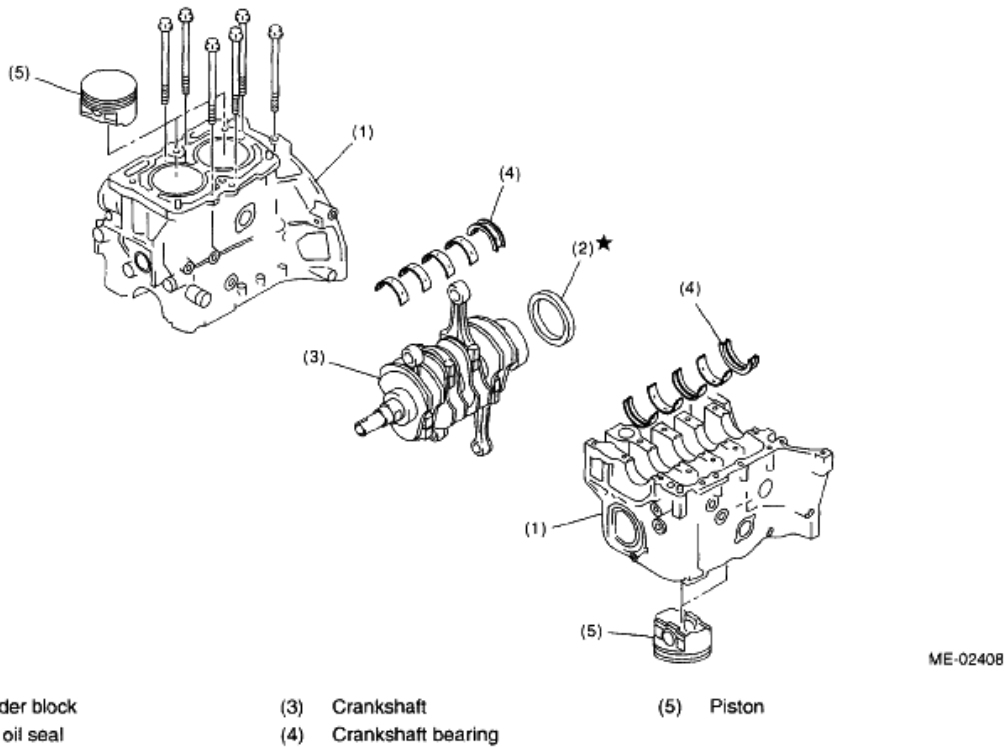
Identifying Rear Oil Seal, Crankshaft, Crankshaft Bearing And Piston
